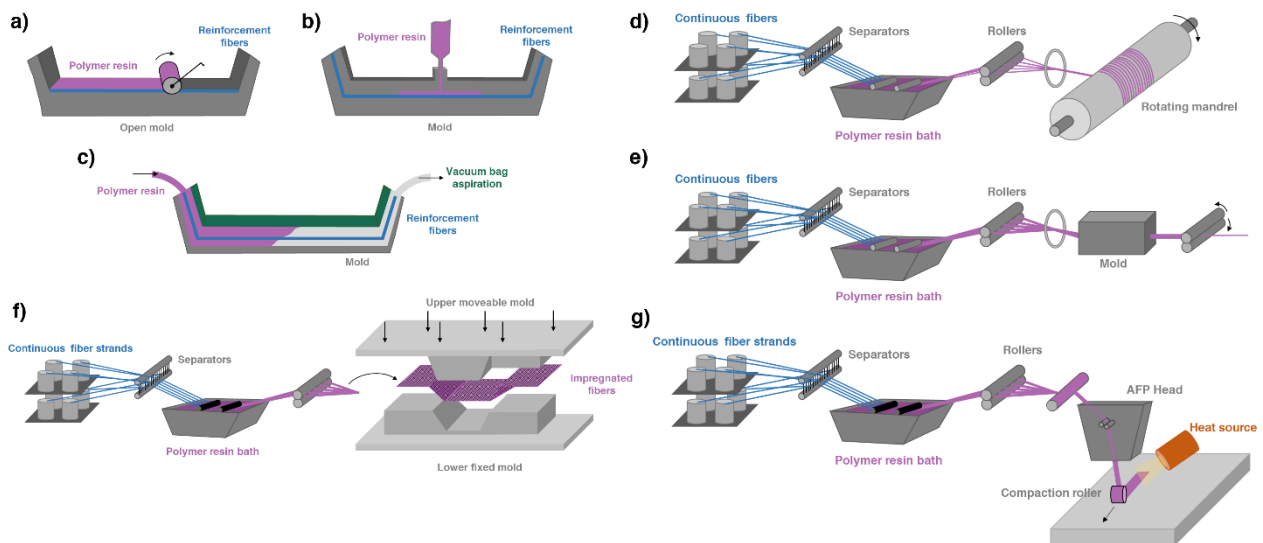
Schematic illustration of manufacturing techniques for GFRPs production: a) hand lay-up, b) resin transfer molding (RTM), c) vacuum-assisted resin transfer molding (VARTM), d) filament winding, e) pultrusion, f) compression molding, g) automated fiber placement (AFP)⁶.
